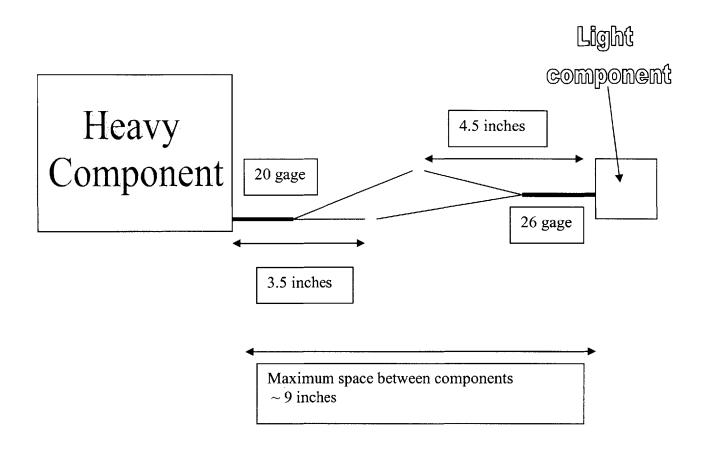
Shows space restriction for welding 20 to 26 gage wires. The wires exit the components in a twisted pair configuration. The light component may be located on top of the weld head during the welding process.
